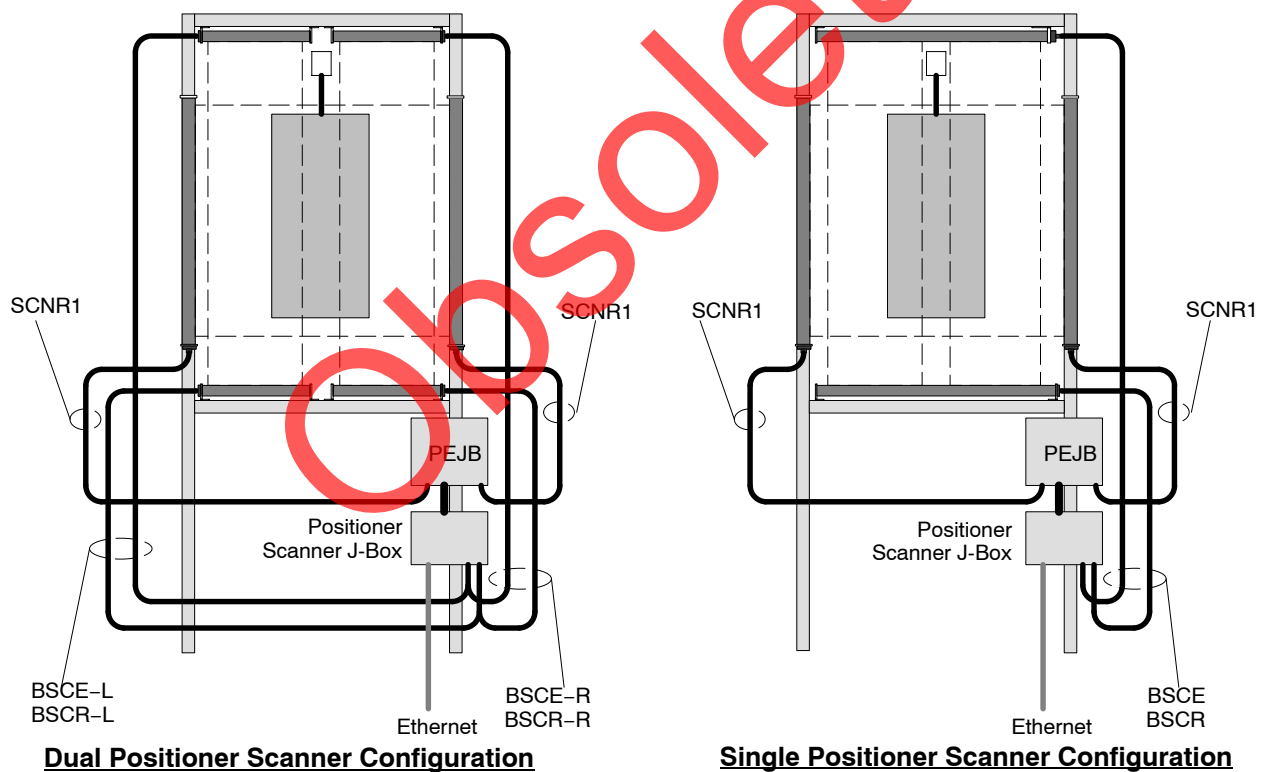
System Wiring – In/Out Positioner Scanner Connections
